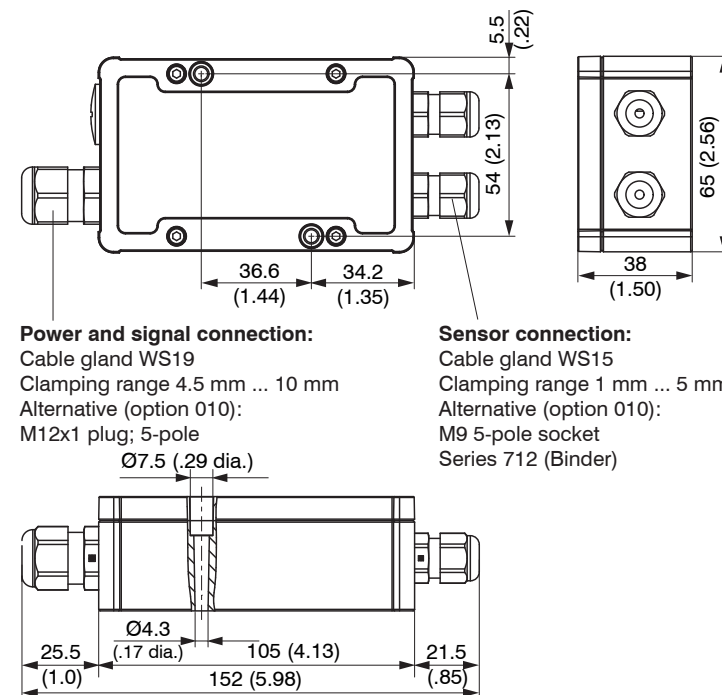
Dimensions of MSC7802<sup>1</sup> controller, dimensions in mm, not to scale
